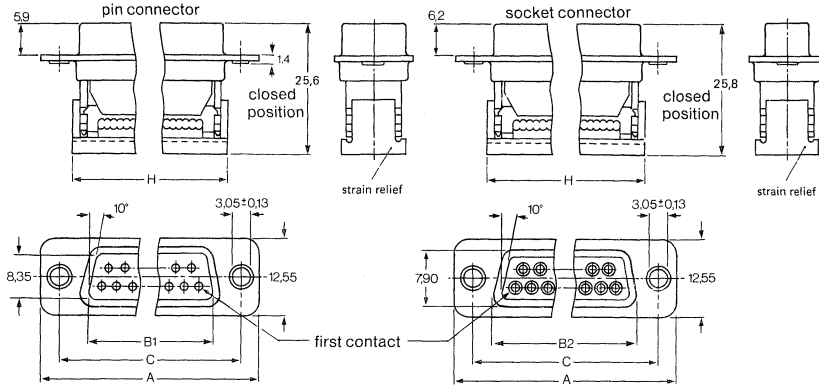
Pin and socket connector, version with metal shell. See Table 2 for dimensions A, B1, B2, C and H.
